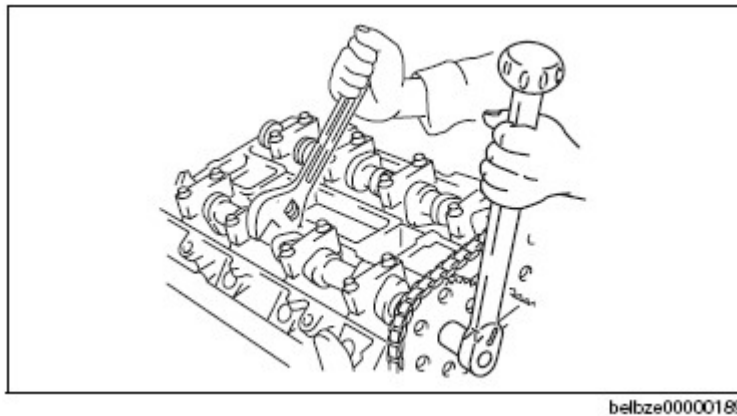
Tightening Camshaft Sprocket Lock Bolt
